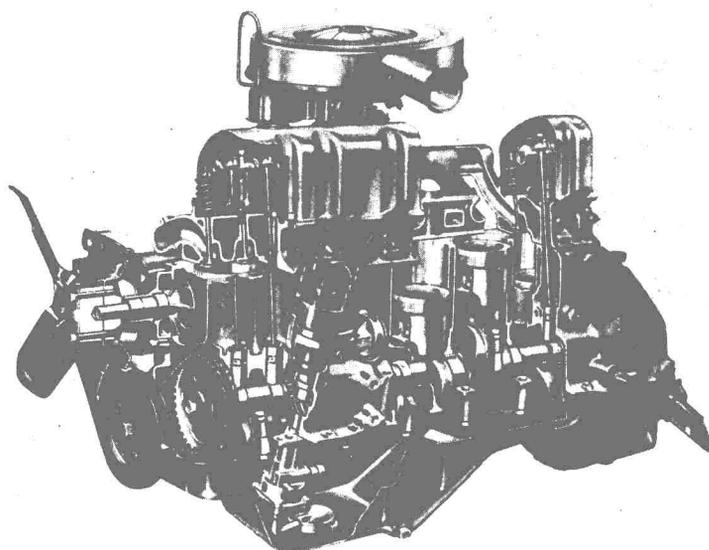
Six-cylinder, in-line engine with overhead valves, partly cut away to show the internal construction. (Ford Motor Company)
